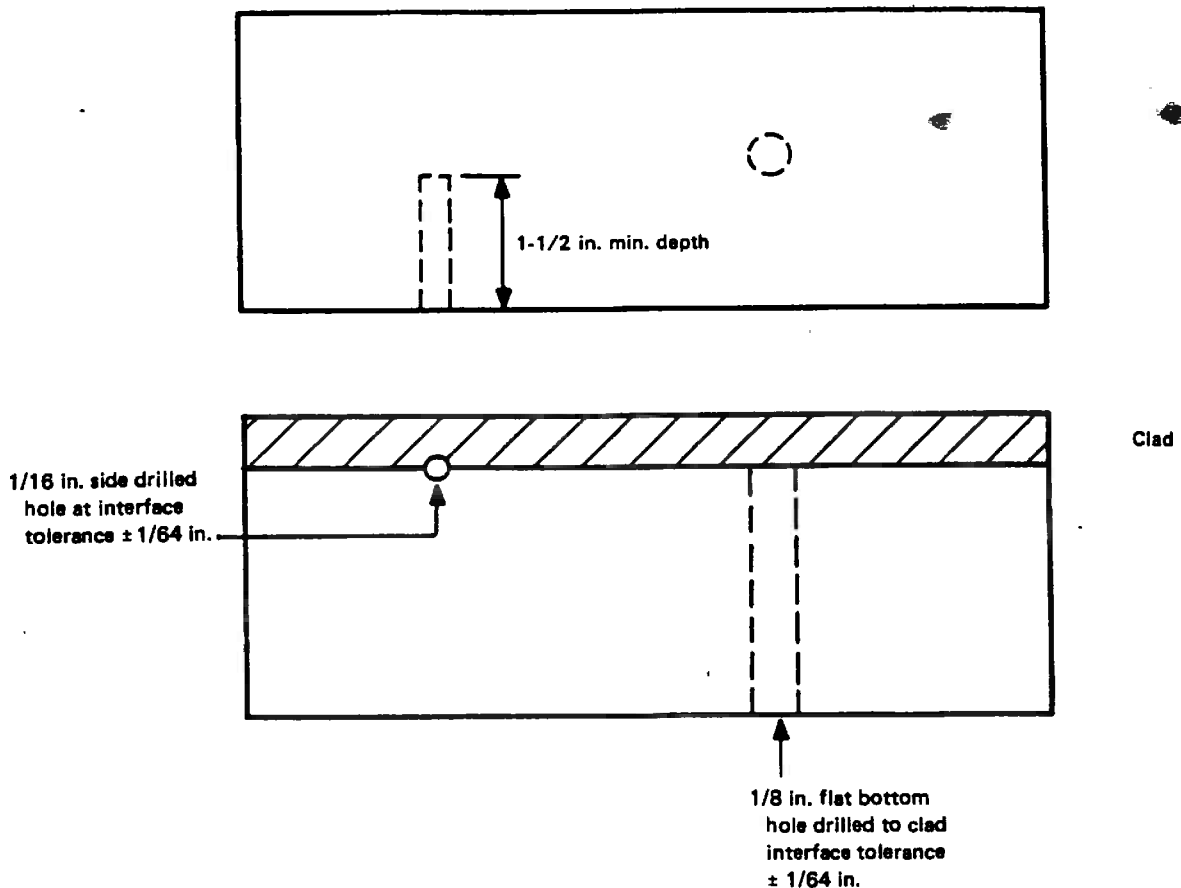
CALIBRATION BLOCK FOR TECHNIQUE ONE
